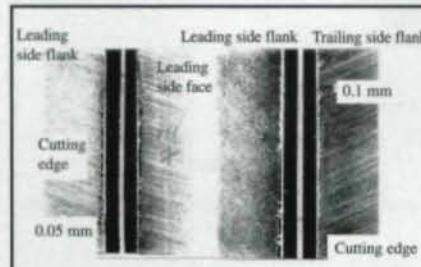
Wear patterns on rake face and flank of coated Hob F after cutting 10 carburized gears.
